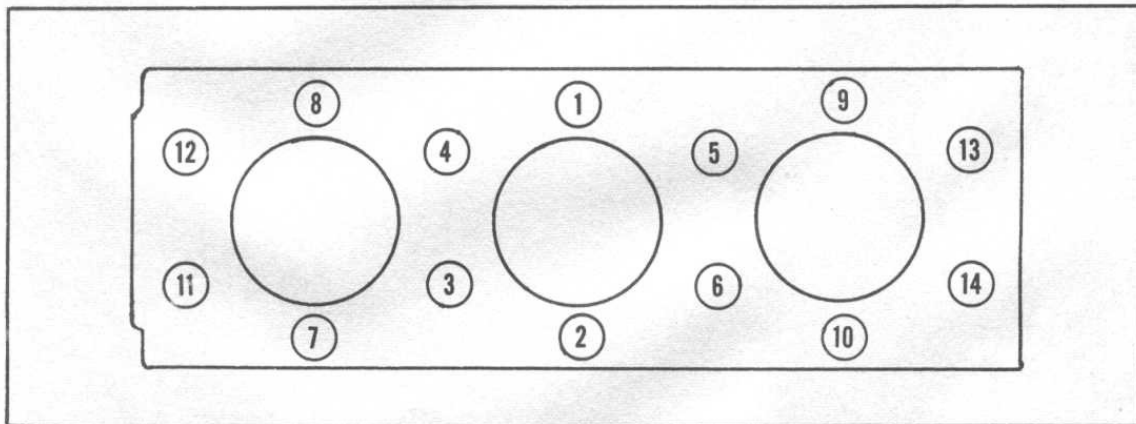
Cylinder Head Cap Screw Tightening Sequence
